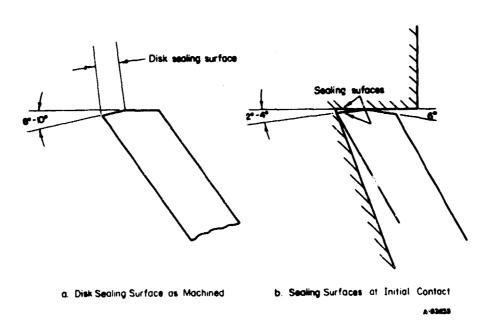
MODIFICATION OF DISK SEALING SURFACE (See Figure 3 for initial configuration.)
